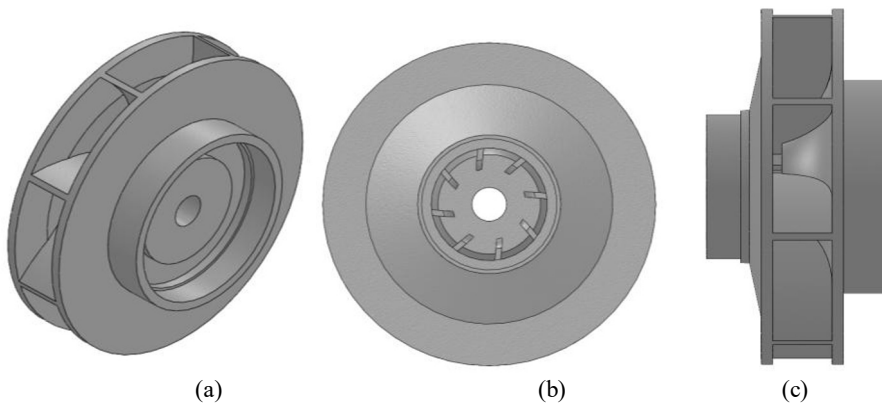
3D modelling of the impeller (a) Isometric view (b) Side view and (c) Front view
